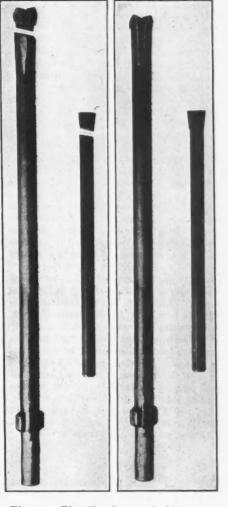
Side and end views of the Hawkesworth shank. Round machine and hexagonal steel shown
